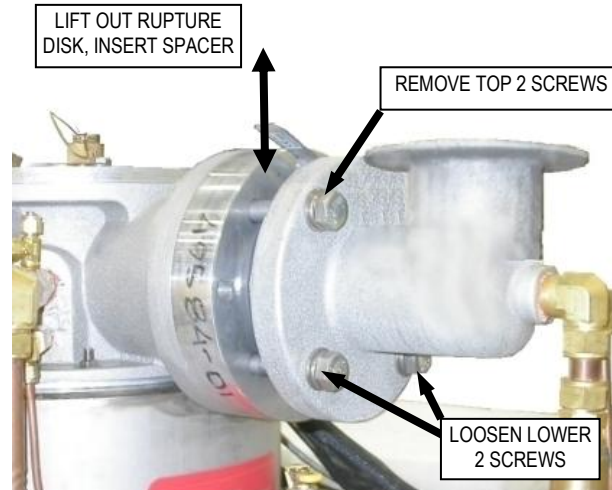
Remove the top two mounting screws to remove the rupture disk. HFO shown.
